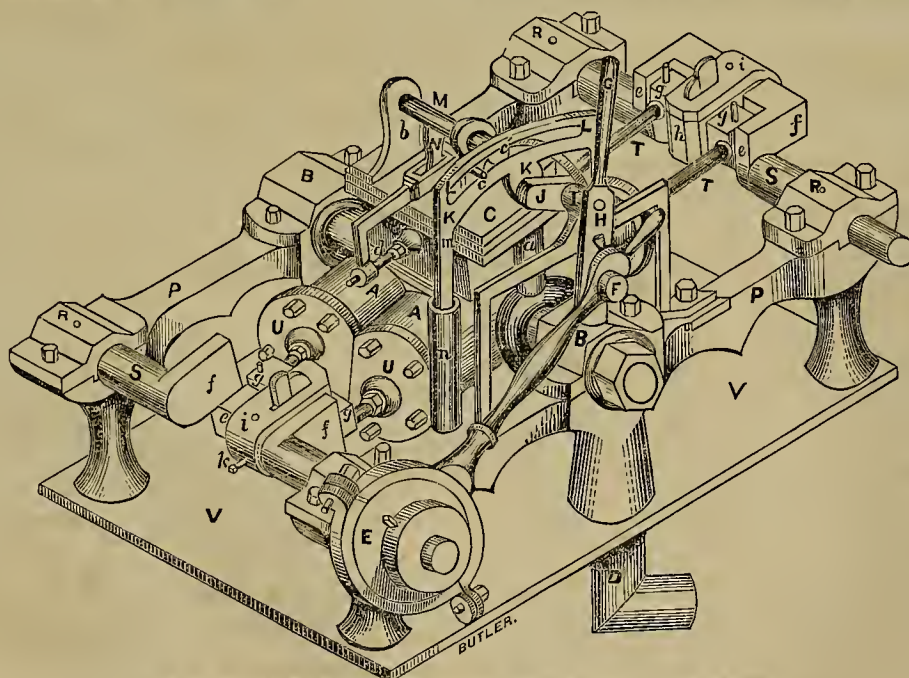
HILL'S PATENT DIRECT-ACTING DOUBLE OSCILLATING ENGINE.
